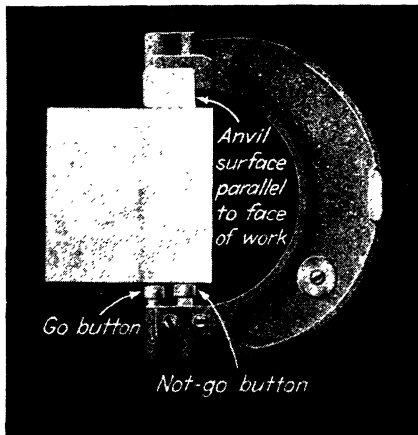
Snap gaging a piece with parallel surfaces (piece is 'undersize'). (Courtesy of U.S. Office of Education.)
